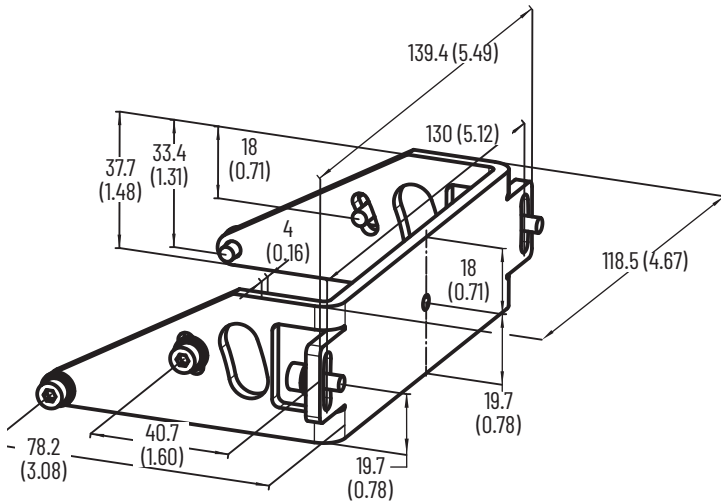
Mounting Kit Dimensions [mm (in.)]
